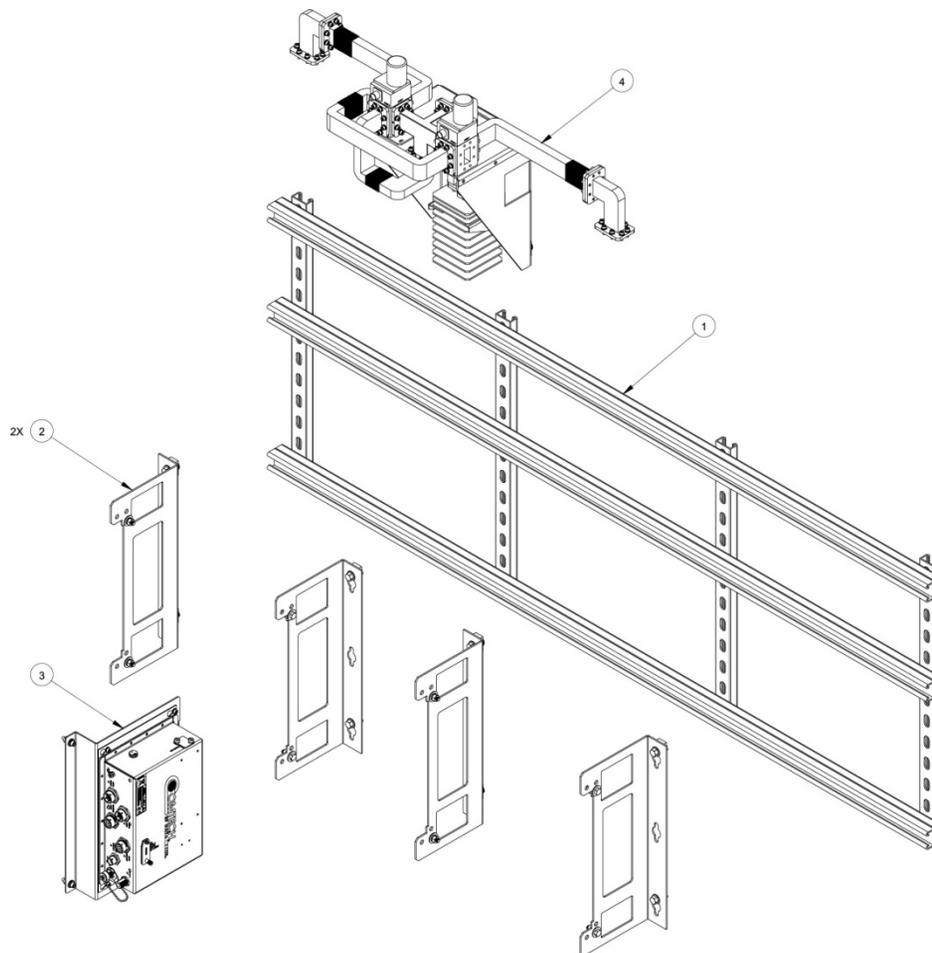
C-Band 1+1 Phase Combined HPOD Top Assembly Kit (KT-000055)
